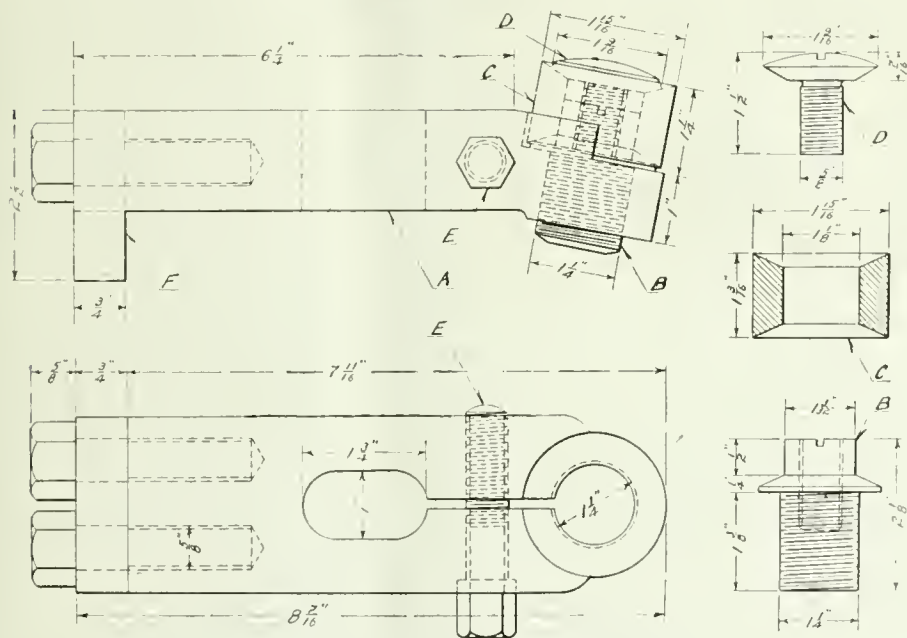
SPECIAL CIRCULAR TURNING TOOL.
